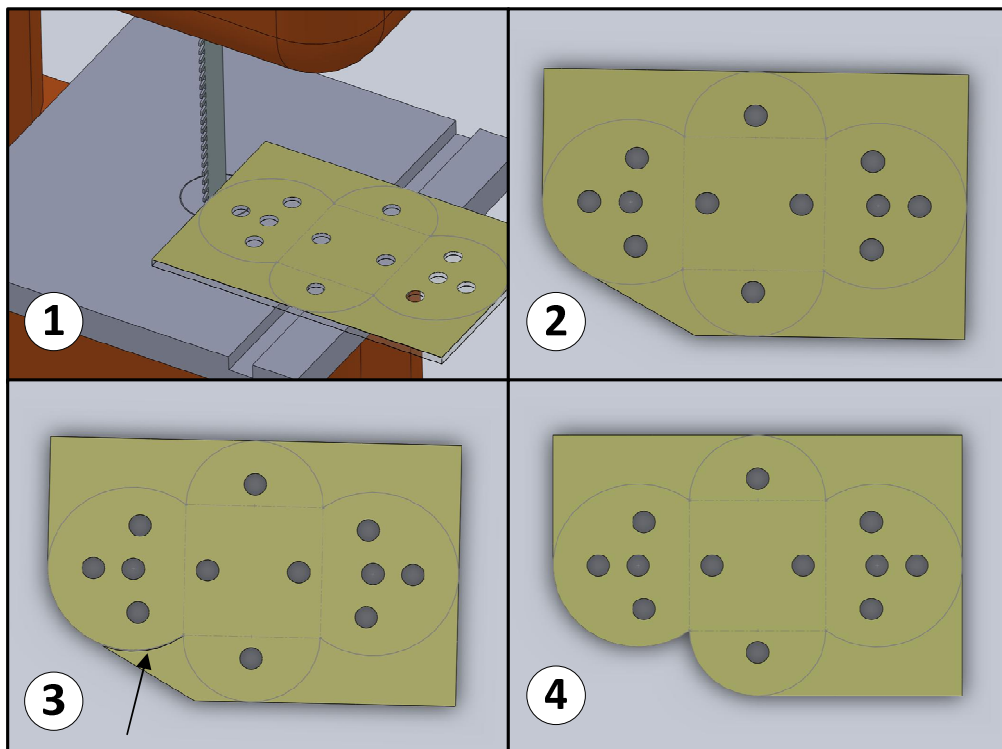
Cutting out piece with the band saw- (1) Positioning for the first cut. (2) First cut complete. (3) Second cut, notice it only leaves a kerf. (4) Third cut which removes the desired piece.
